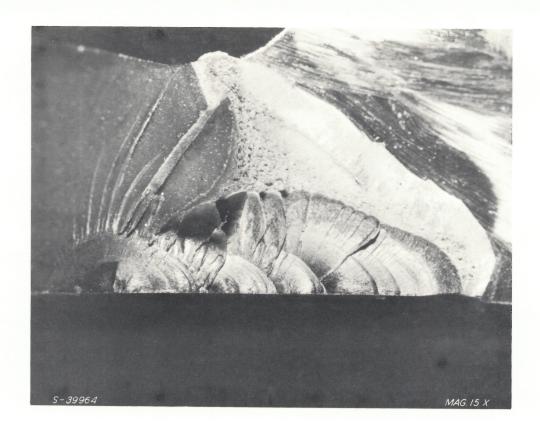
Enlarged View of Multiple Fatigue Cracks Developing from Corrosion Fatigue Pits caused by Contaminated Oil on the Shaft Shown in Fig. 16.
